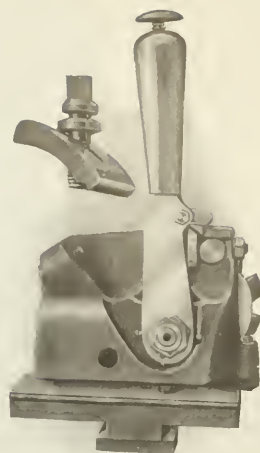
View of Tool showing Adjustment for Depth of Cut
